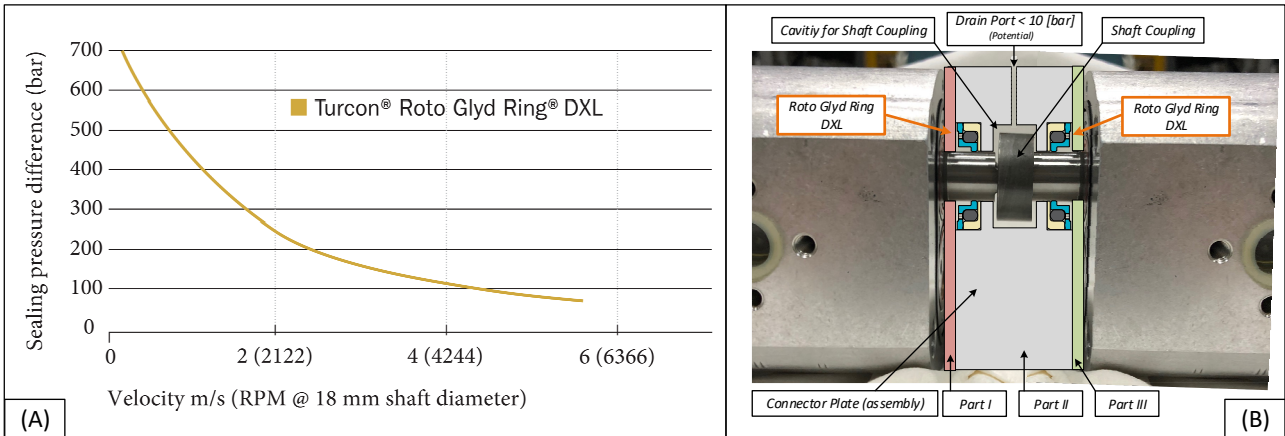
(A) Limitations for shaft seal. (B) Pump modification necessary to hydraulically separate the pumps.
